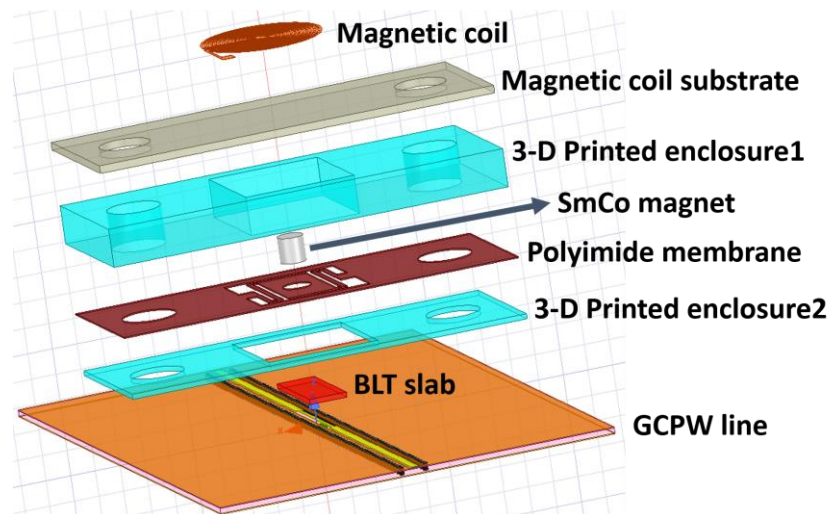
Exploded 3-D view of phase shifter with magnetic actuator and 3-D printed enclosure.
